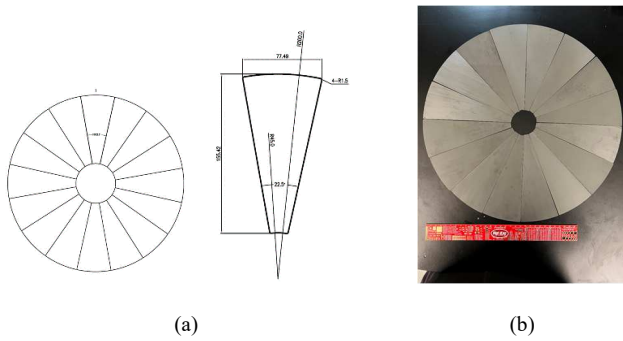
DMR51W cores (a) drawing of fabrication plan (b) fabricated ferrite cores
